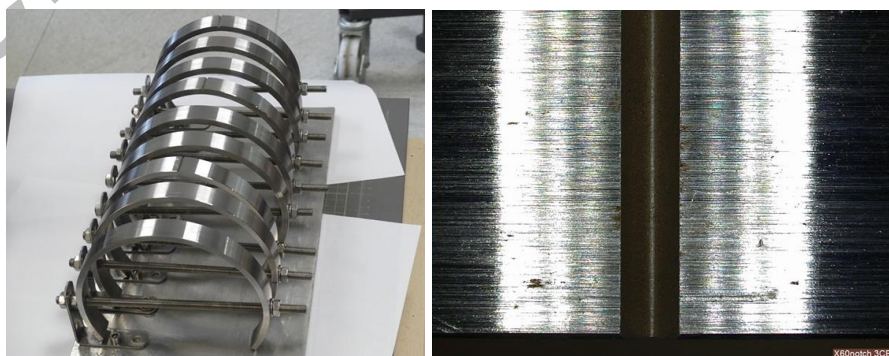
Detail of tested C-ring specimens (3rd campaign)
